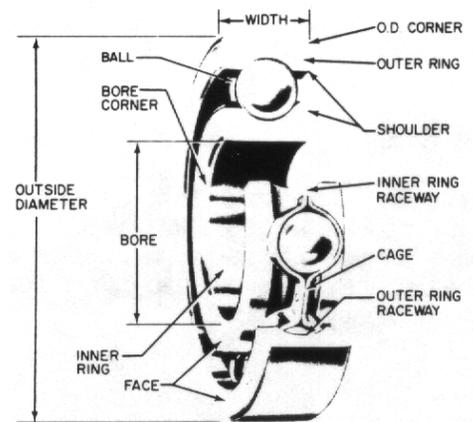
shows a typical bearing with the various parts identified. Various bearing manufacturers may use slightly different terminology, however, those indicated are the most commonly used.
